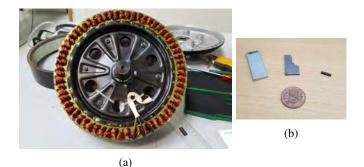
(a) Disassembly process, (b) Magnet samples.
